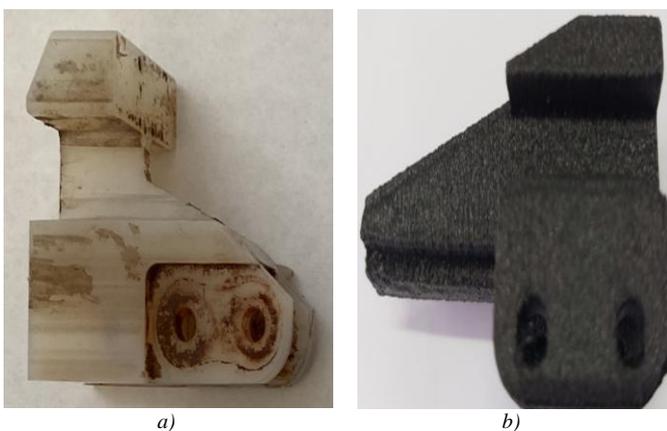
Appearance of the products "Pusher F08575326" (a) and "Pusher 406.42.0490" (b), obtained by injection molding (a) and FDM printing technology (b)
